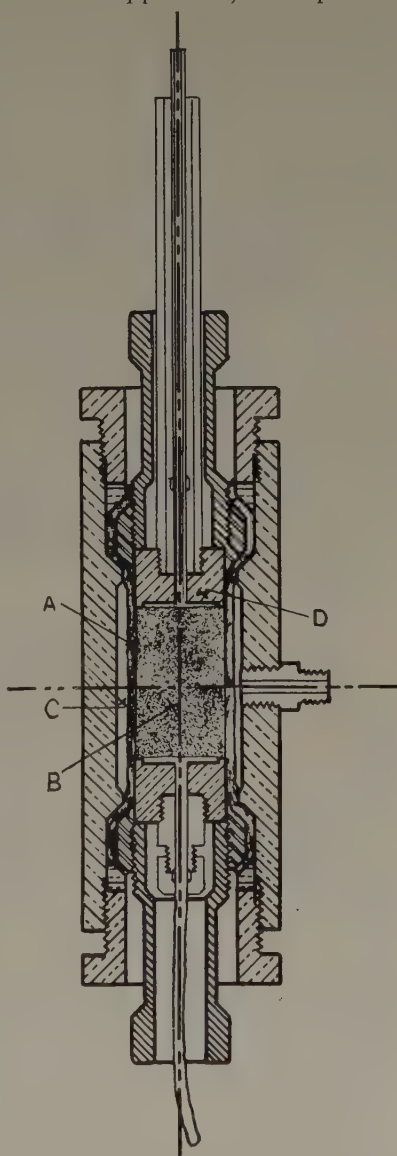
SECTION OF CORE HOLDER. Two kinds of end fittings are shown, one (below) with a compression fitting to take $\frac{1}{8}$ -in. copper tubing, the other with a soldered connection and a $\frac{1}{4}$ -in. pipe section screwed into the end plug *D*. This pipe can be used to push out the core forcibly when necessary.
